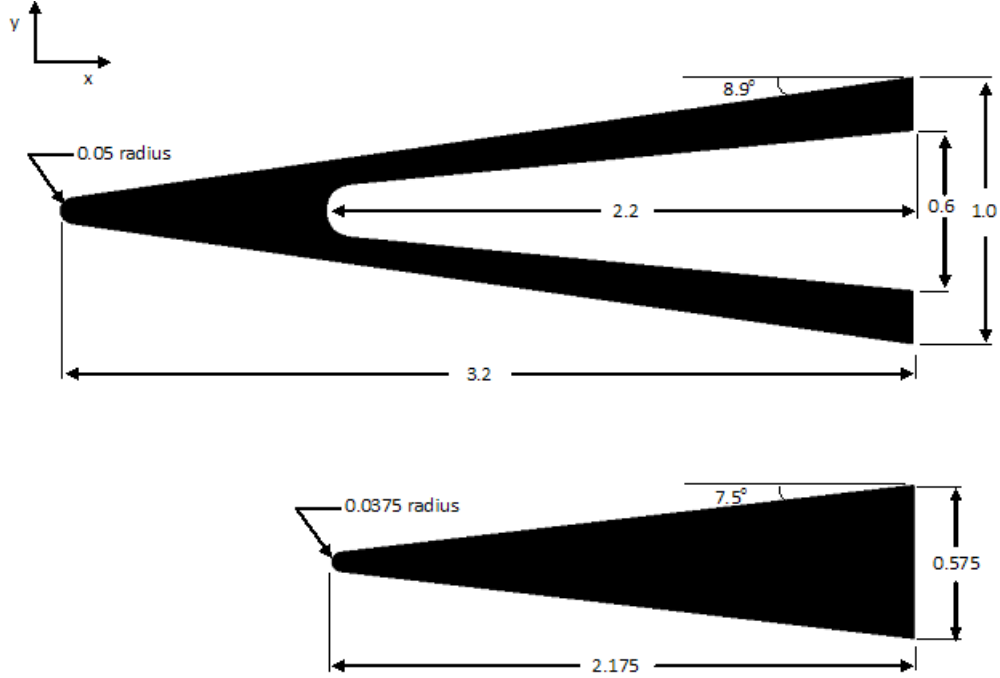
Dimensional Drawing of Carrier Shell and Store
